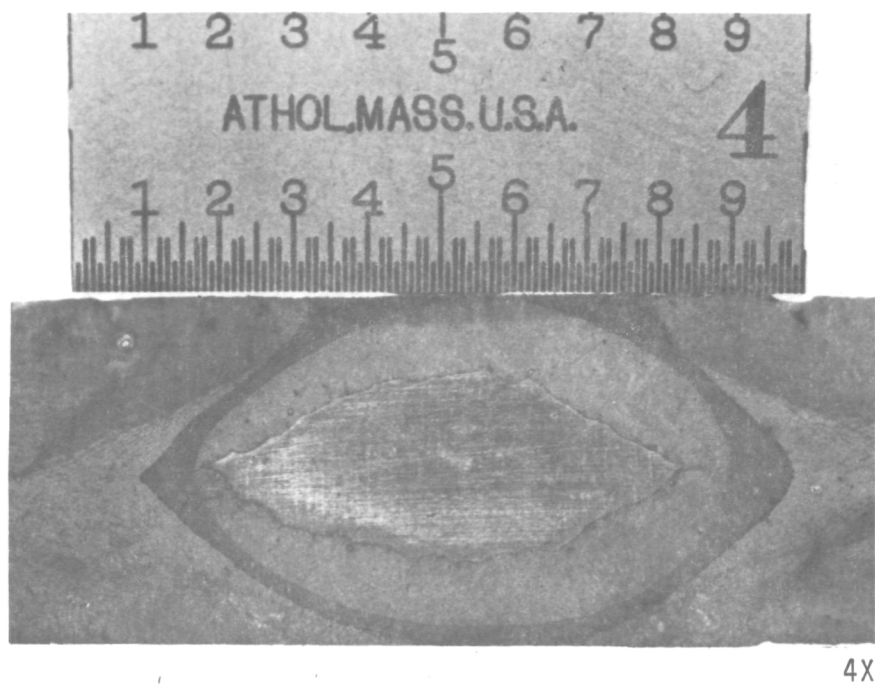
Flaw map and fractograph for specimen F-15 after breakthrough.
